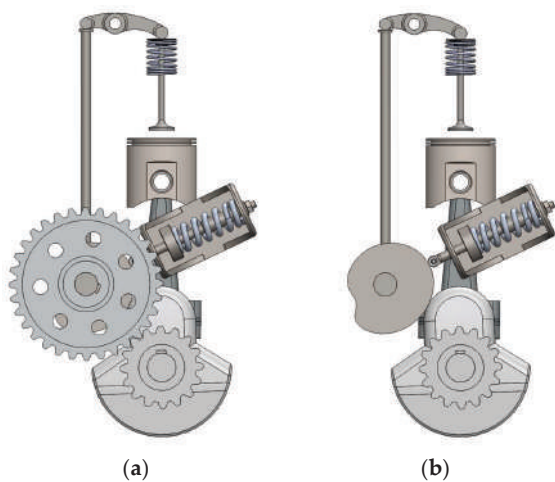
Front views of the CAD model from the (a) mechanism integrated on the single-cylinder engine, on image (b) the camshaft gear was removed to show the positioning of the balancing cam.
